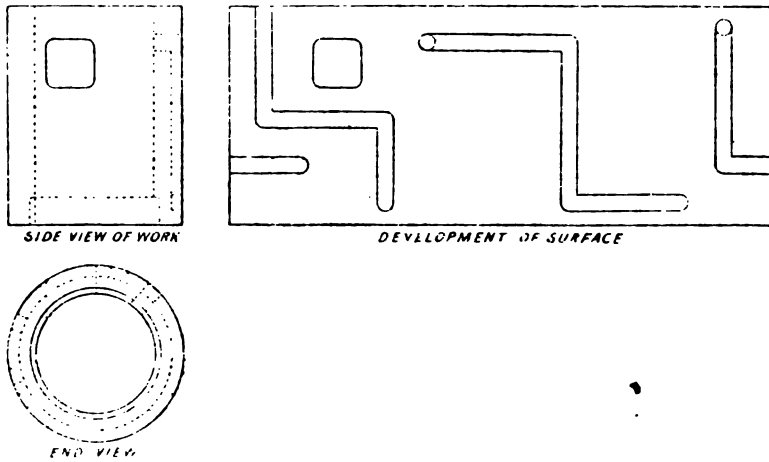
Development of Surface of Valve, cut on Three-Spindle Machine.
